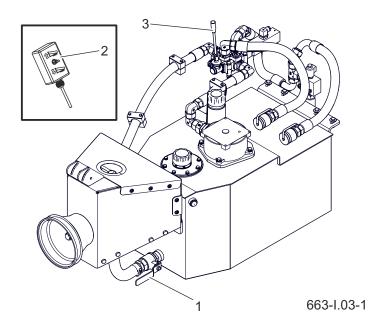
Hydraulic system (1) ball valve (2) remote control (3) manifold lever
